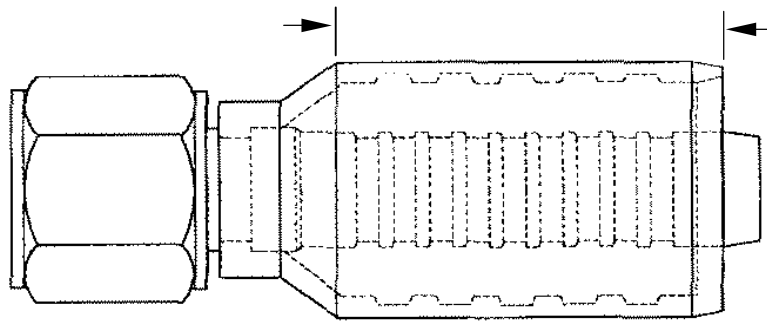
Representative Swage Fitting Illustrating Hose-to-Ferrule Insertion Dimension
